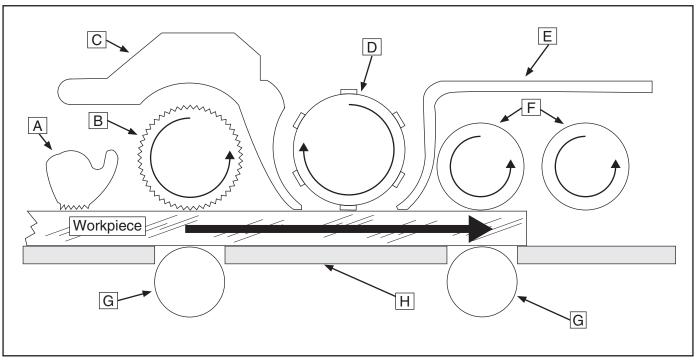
Model G0603X workpiece path and major planing components (side cutaway view).
